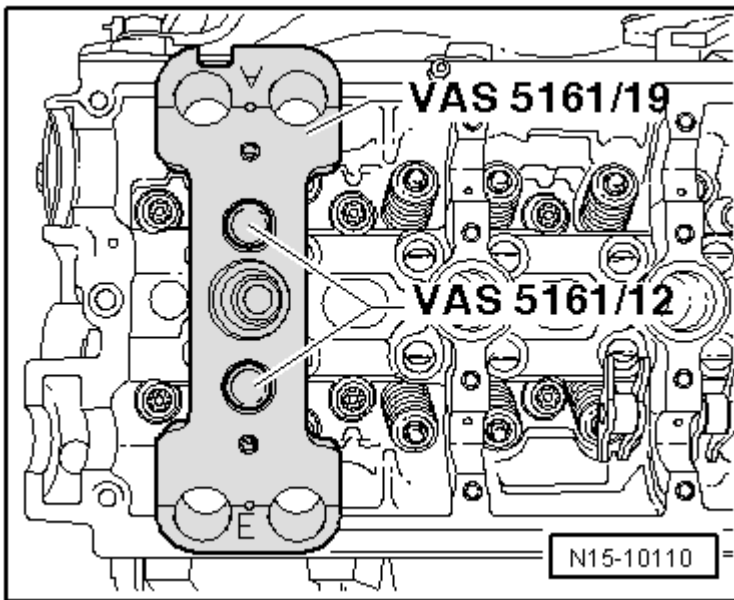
Identifying Install Guide Plate VAS 5161/19 With Knurled Bolts VAS 5161/12 On Cylinder Head
